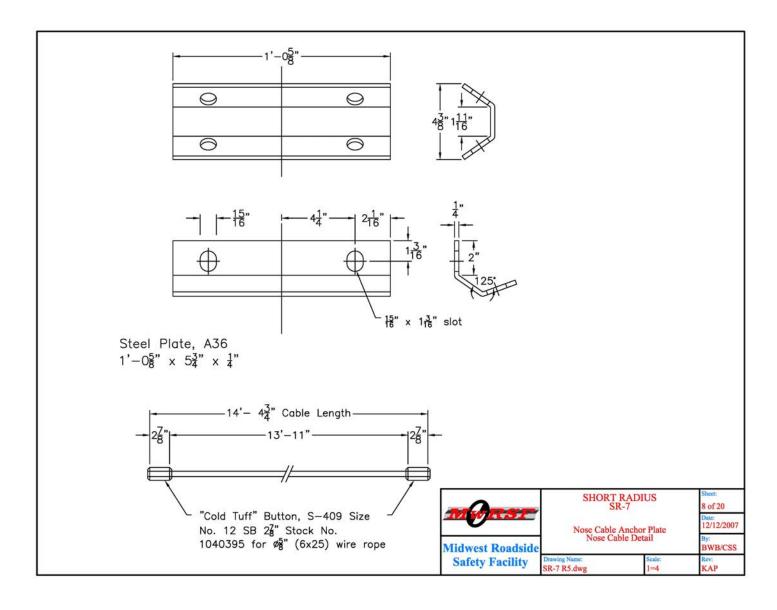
Nose Cable Anchor Plate and Nose Cable Detail (English)
